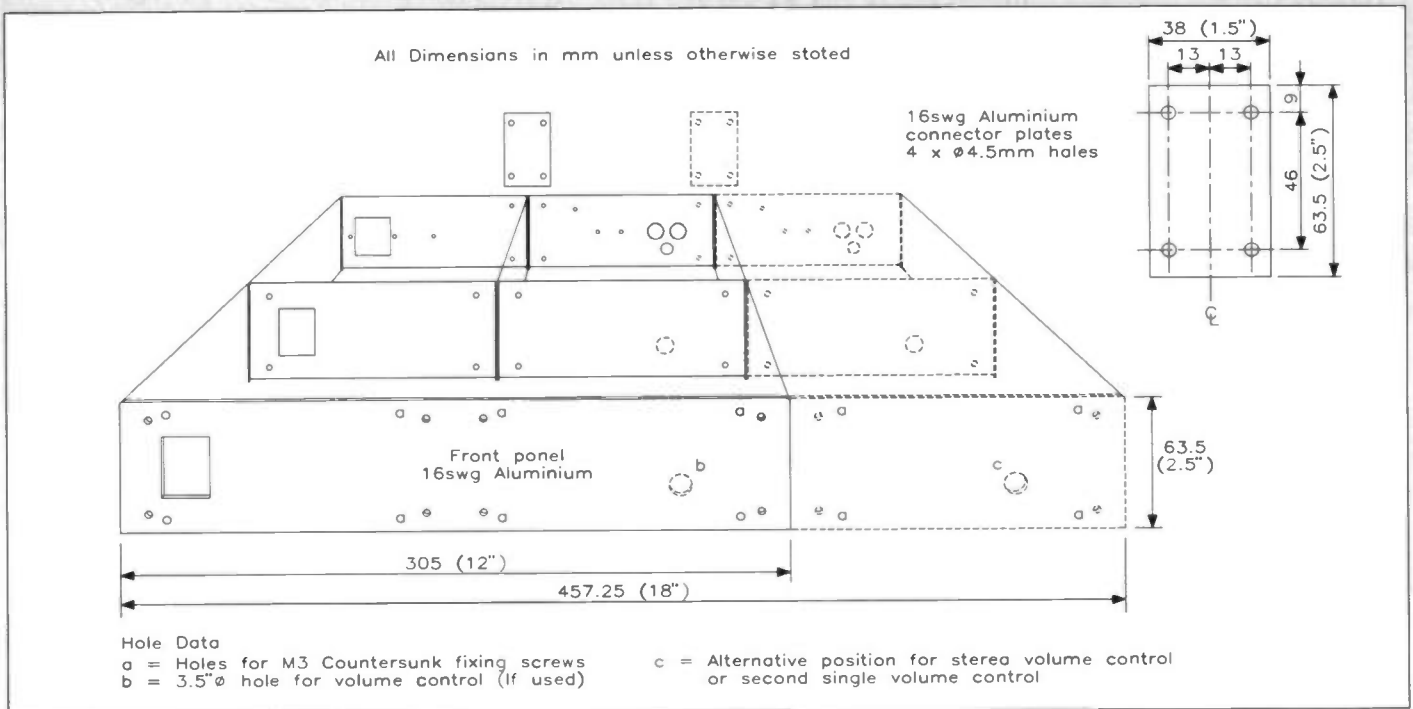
Suggested method for joining two or more chassis together to create a final monobloc or stereo assembly.
